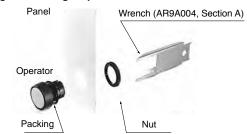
Mounting an operator in a 22.3mm-dia. hole
